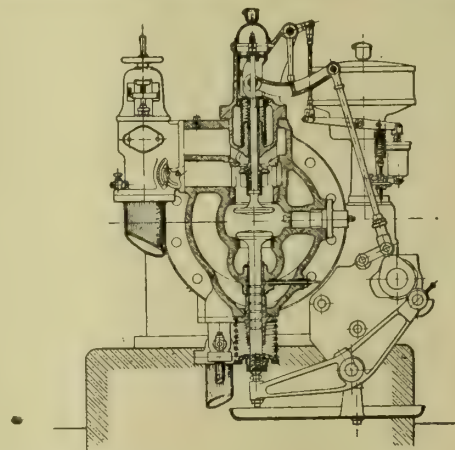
CROSSLEY GAS ENGINE. CROSS SECTION.
